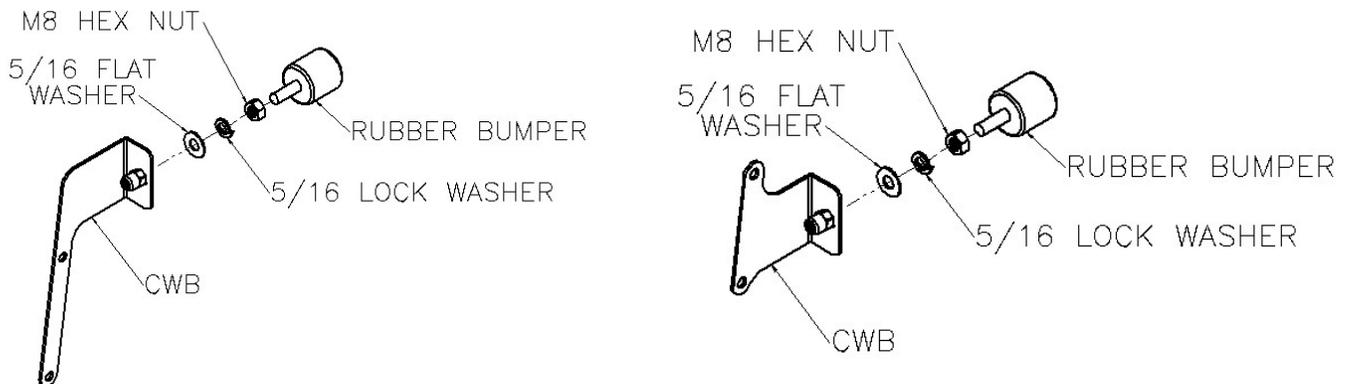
Rubber Bumper Assembly (CWB Shown)
